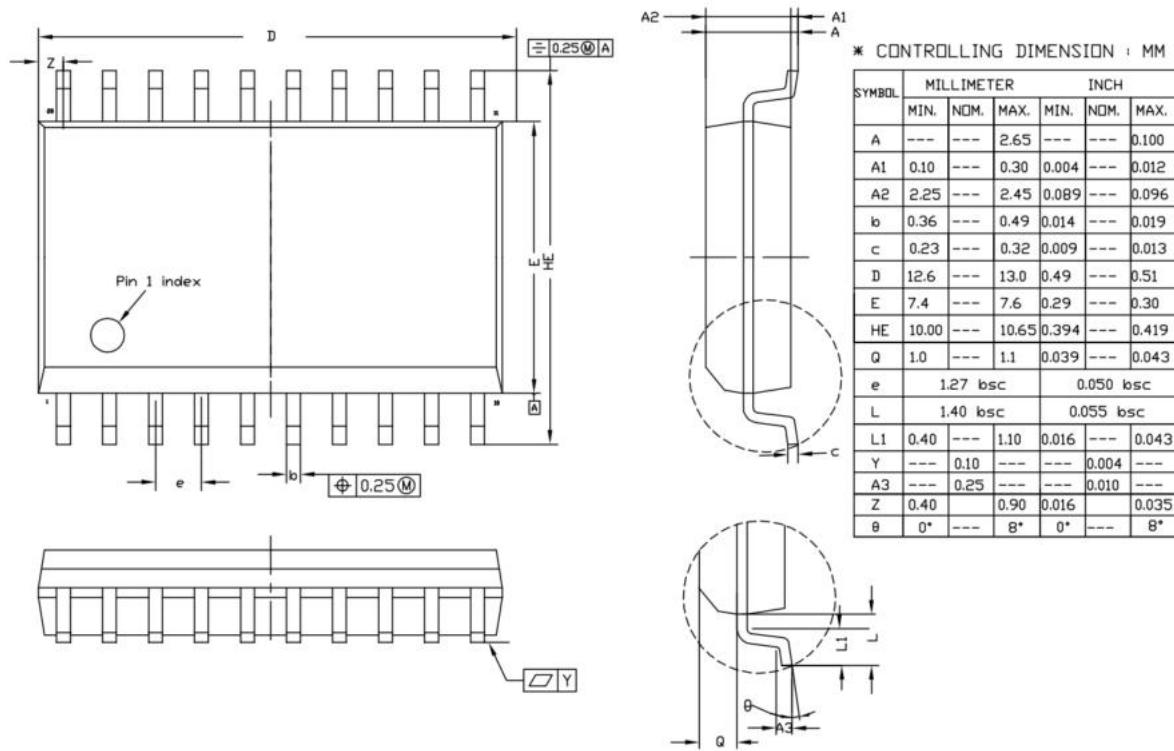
SOW20 Package Shape and Dimension in millimeters
